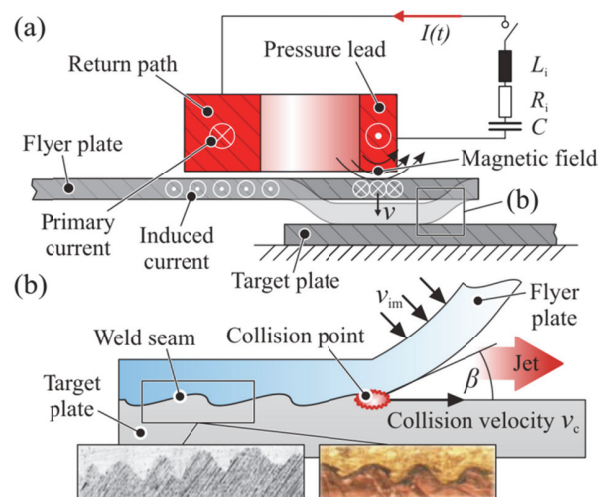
(a) Process principle of magnetic pulse welding; (b) bond formation in magnetic pulse welding [1].
